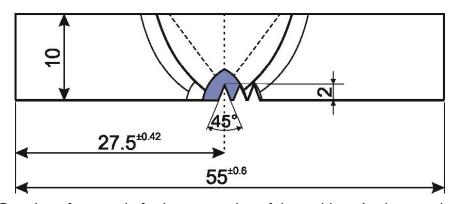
Drawing of a sample for impact testing of the weld root's characteristic zones
